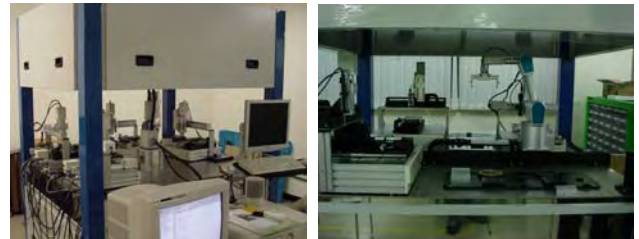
Lens Assembly System Fig. 10 TULA Assembly System
